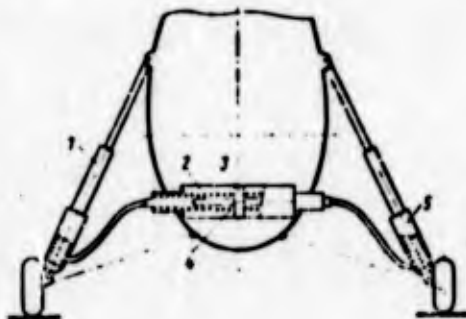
Spring damper installation setup: 1 - low-pressure chamber; 2 - spring damper; 3 - floating piston; 4 - spring; 5 - high-pressure chamber.
